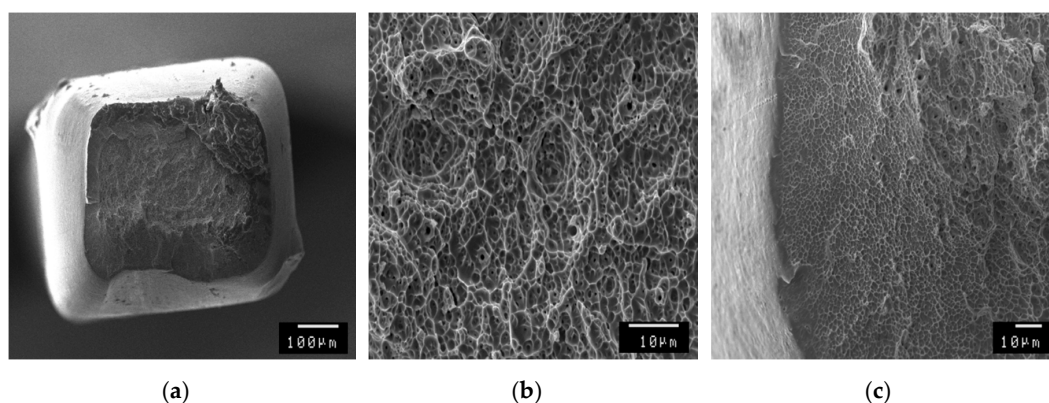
Scanning Electron Microscope images of typical fracture surfaces of annealed specimen: (a) general view; magnified views of (b) center parts and (c) outer part of specimen.
